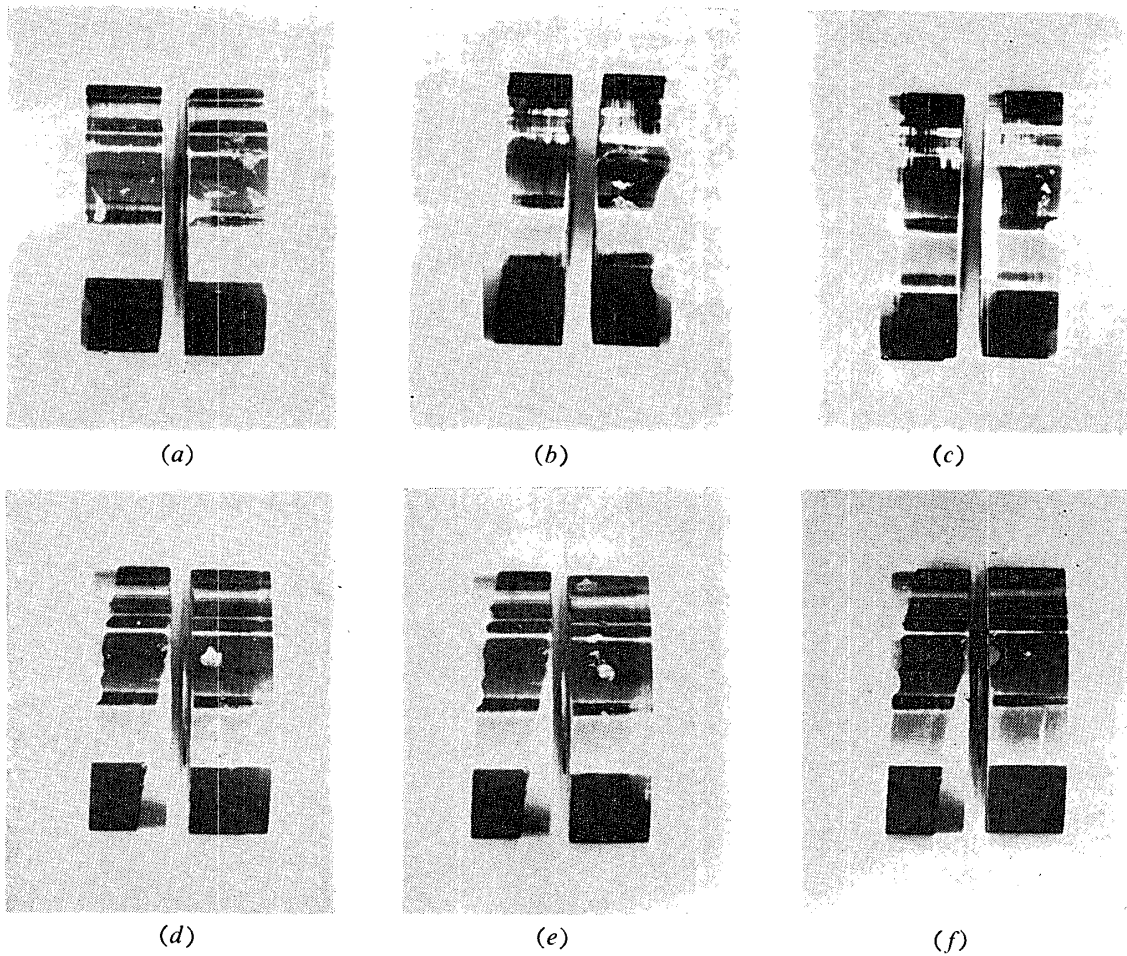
Photographs of pit come to found on the surface of test piece (where : left=lower test piece, right=upper test piece)
